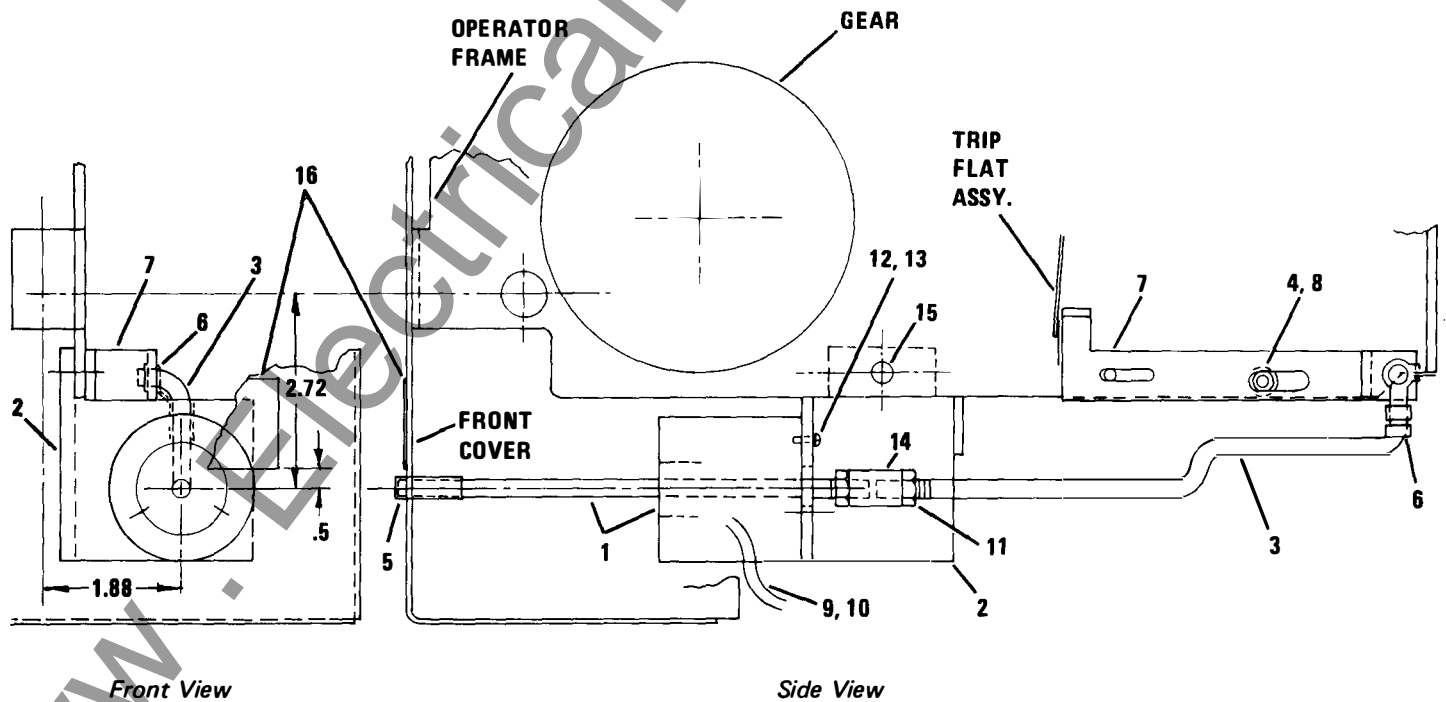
Open Fuse Indicator (Mounted on Breaker)
